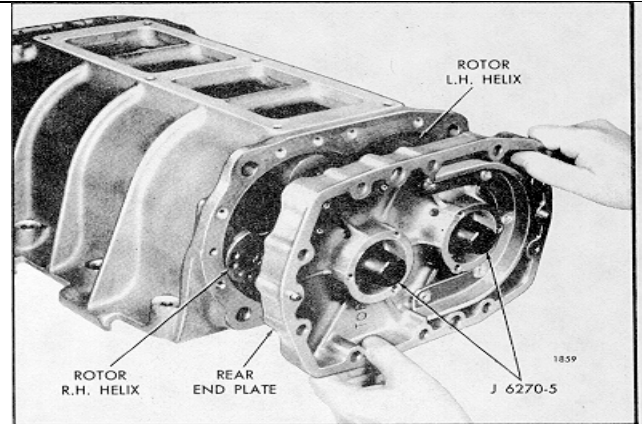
Installing Blower Rear End Plate (Lip Type Oil Seals)
